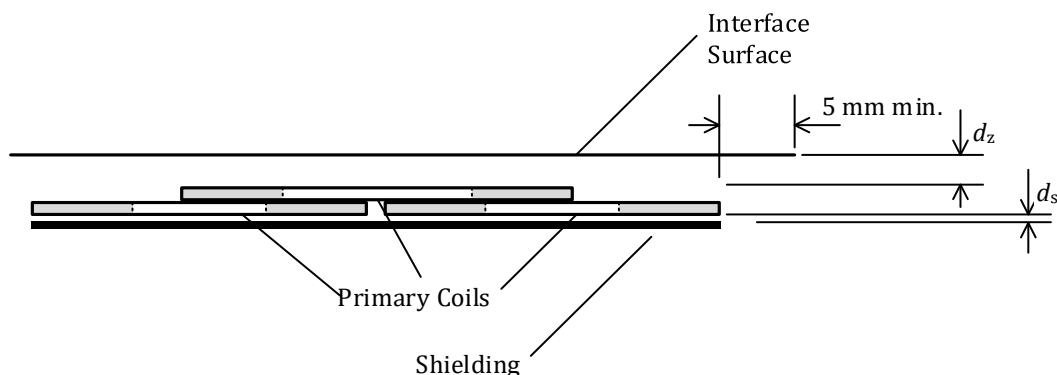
Bottom and Top Primary Coils of Power Transmitter design MP-A6
